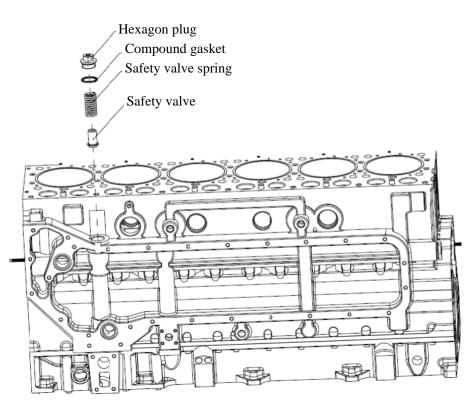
Exploded view of engine oil cooler bypass valve
